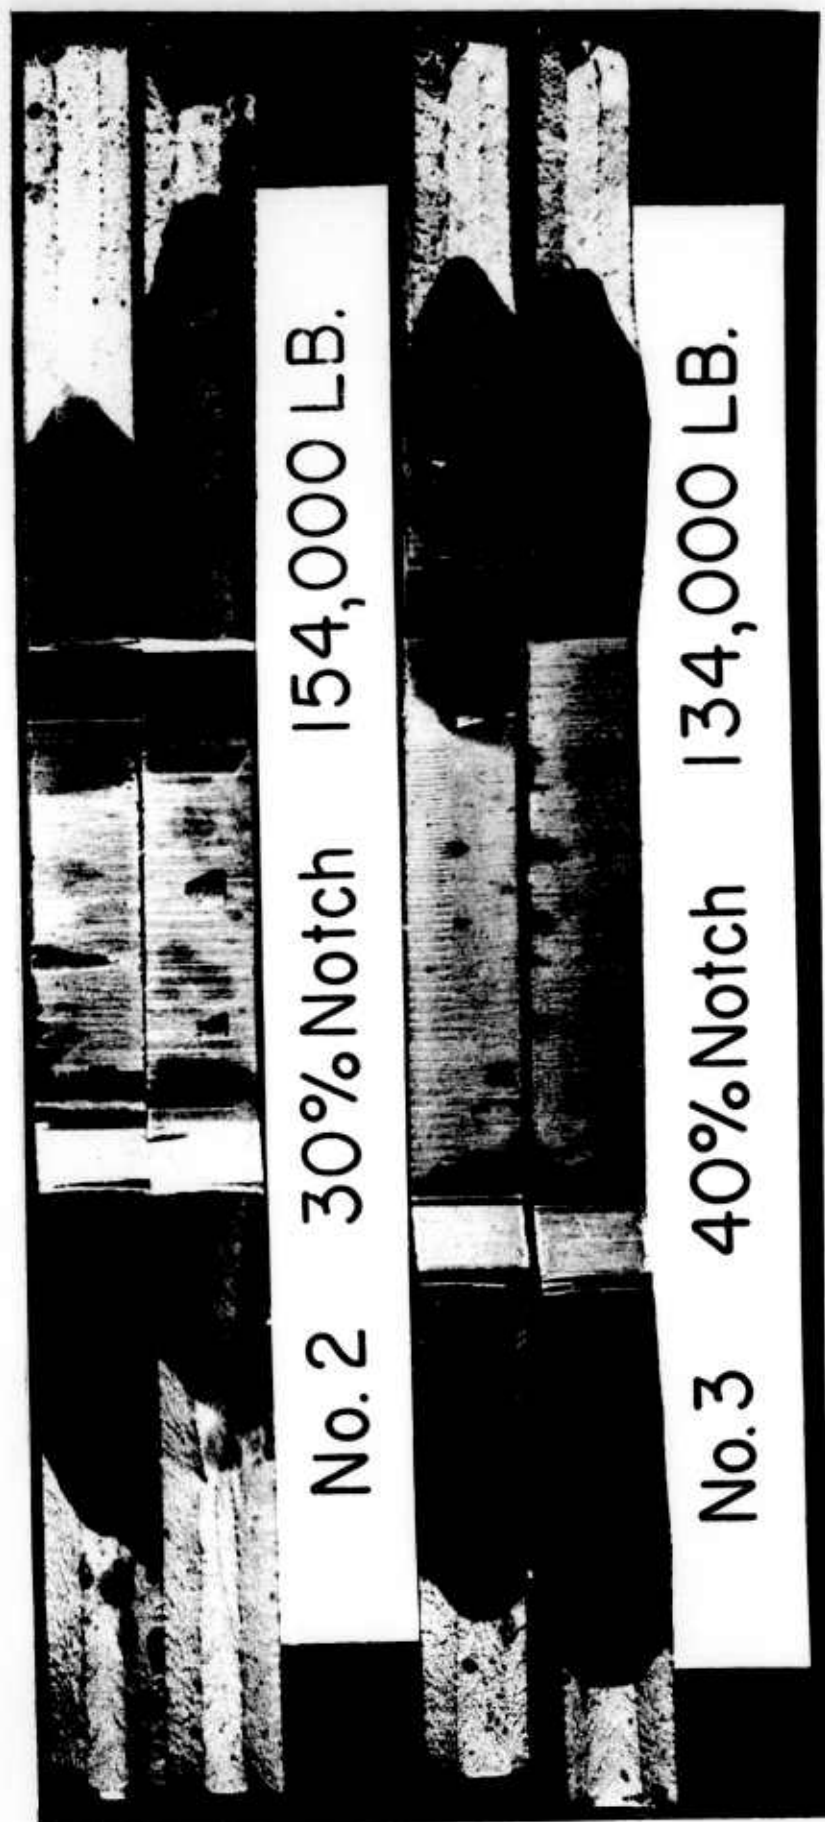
Fracture surfaces in 0.350 in. thick, 6 in. wide plate specimen of 300 Ksi Maraging 18 Per Cent Nickel Steel ($G_c=1170$ psi-in. No. 2 and $G_c=1660$ psi-in. No. 3)
